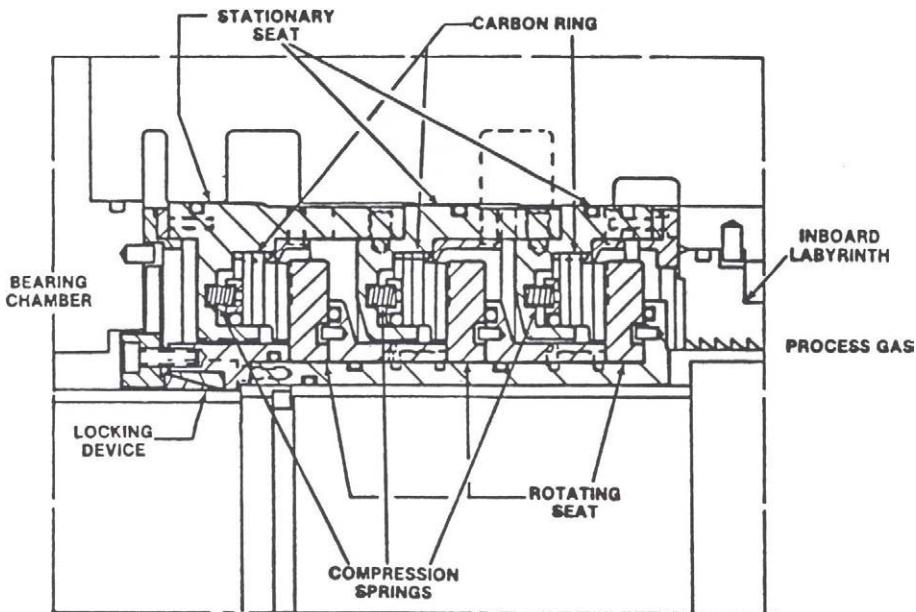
Dry gas seal: tandem dry gas seal arrangement (Courtesy of Dresser-Rand Corp.)
